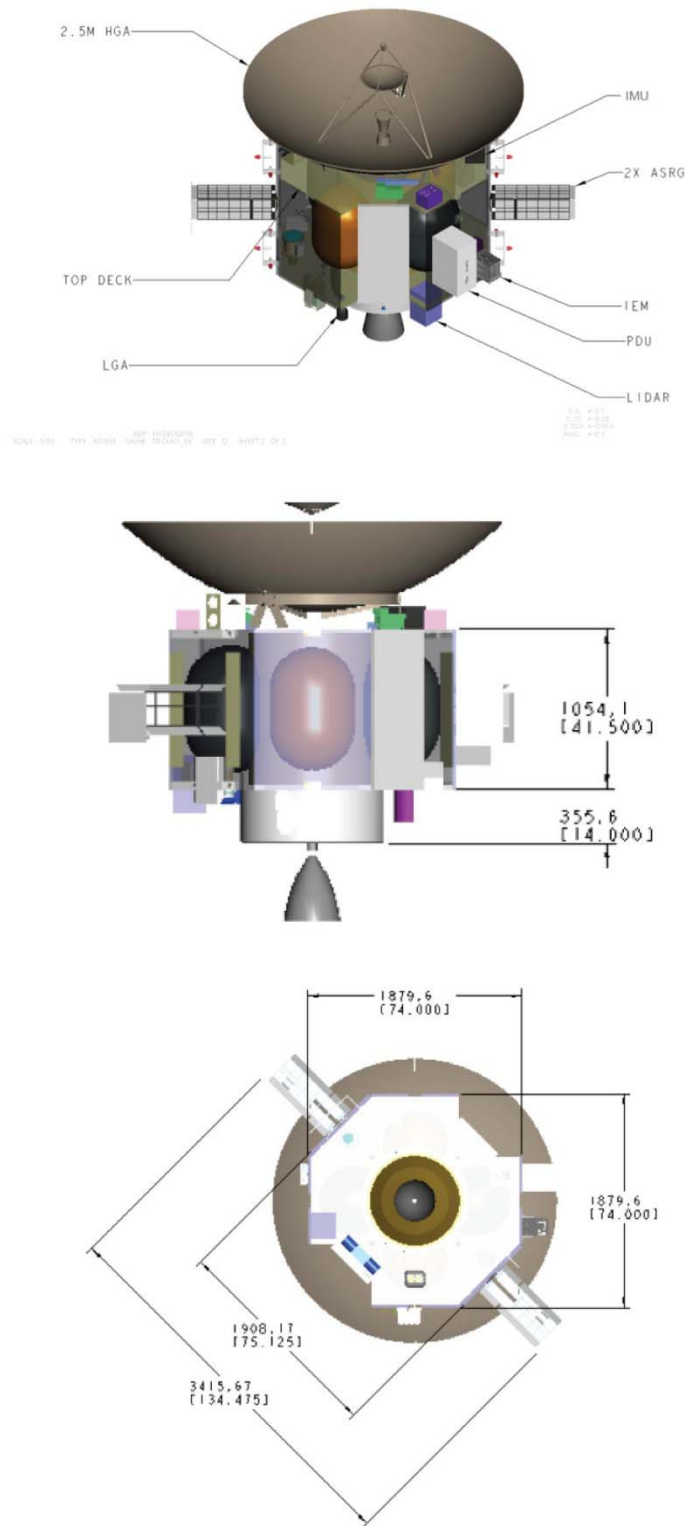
Spacecraft chemical ASRG concept (dimensions shown in mm [inches]).
